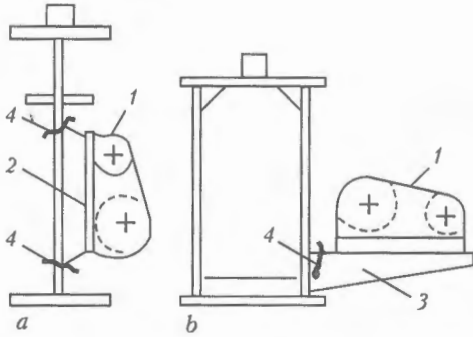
Design stress concentrator formed by fastening of frame (a) or bracket (b) to plate of main beam wall: 1 – reduction gear; 2 – frame; 3 – bracket; 4 – cracks
